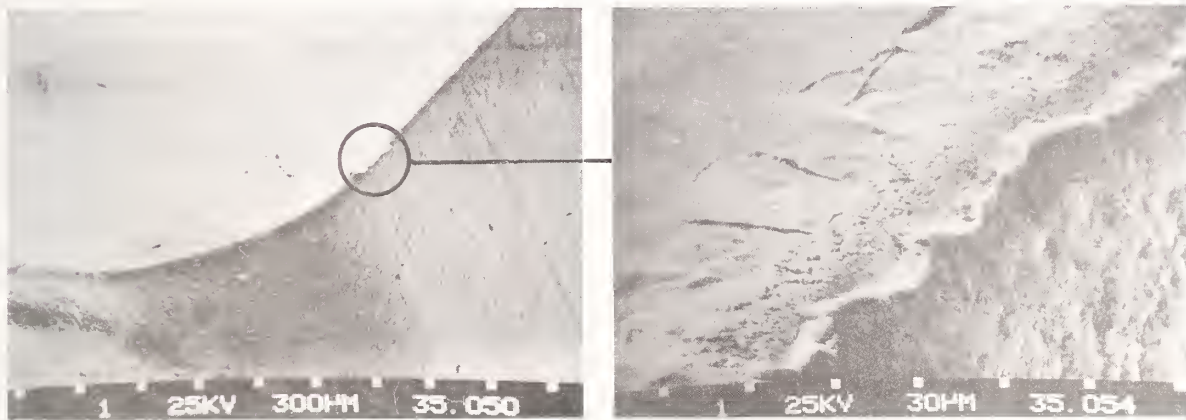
Typical spalling of coating observed with TiN coated K-type substrate tool (KFRP machining)
